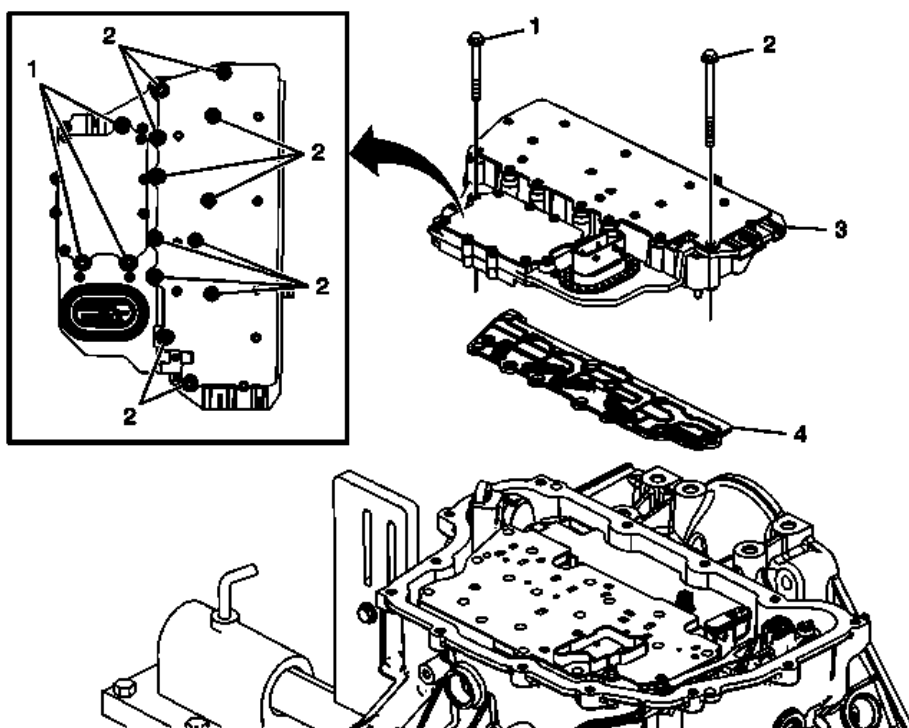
View Of Control Solenoid (w/Body & TCM) Valve Assembly
